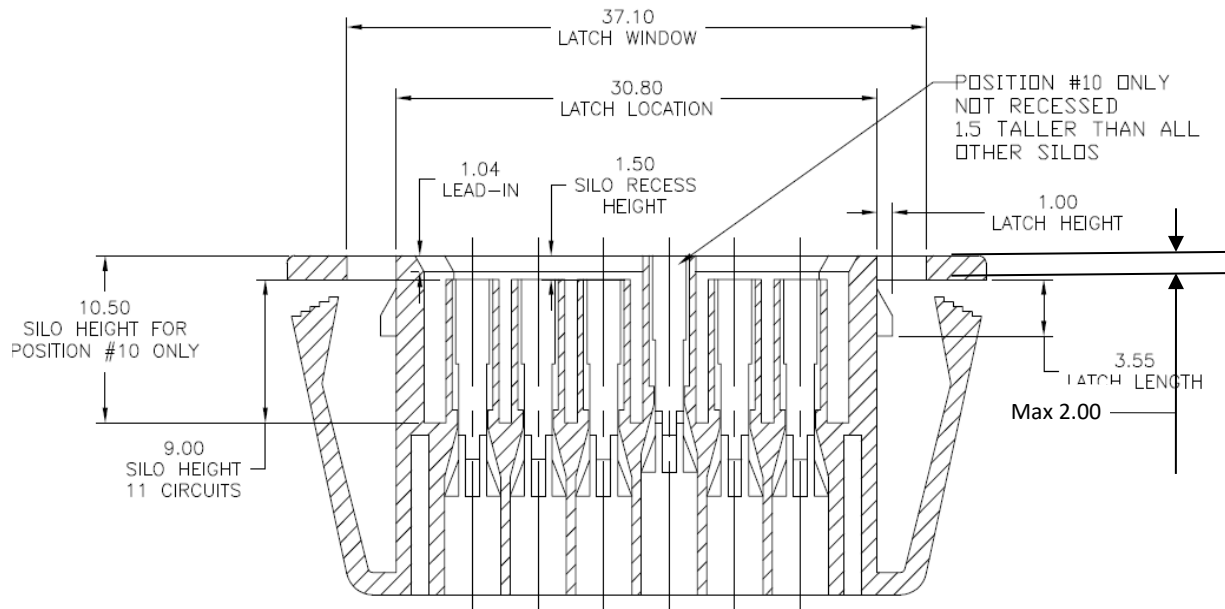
Panel Mount AC SGD Connector Form Factor dimensions
